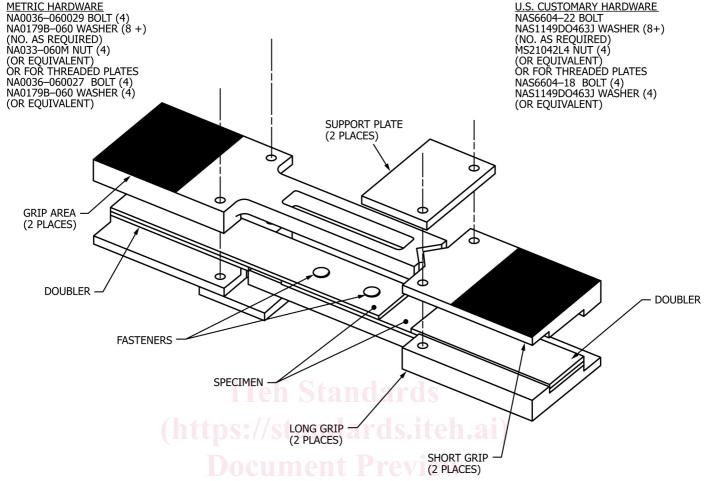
Support Fixture Assembly for Procedure B (for details of the Support Fixture, see Test Method D5961/D5961M)
